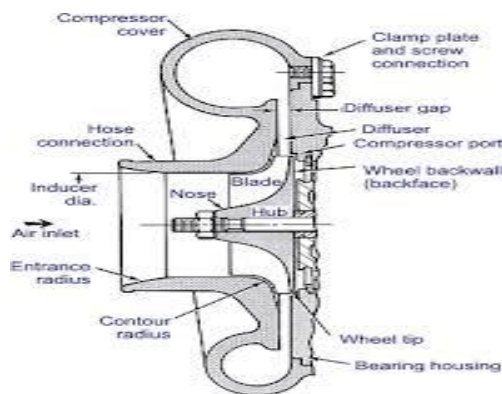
Cut section of a micro jet engine showing snail shape inlet
